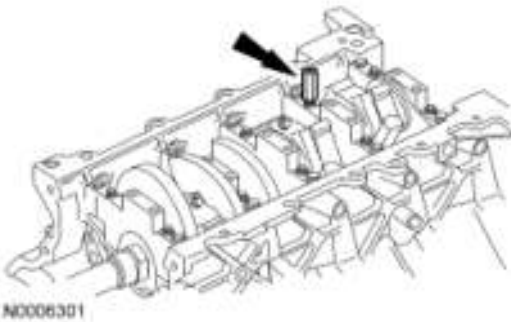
Installing Oil Pump Screen And Pickup Tube Spacer
